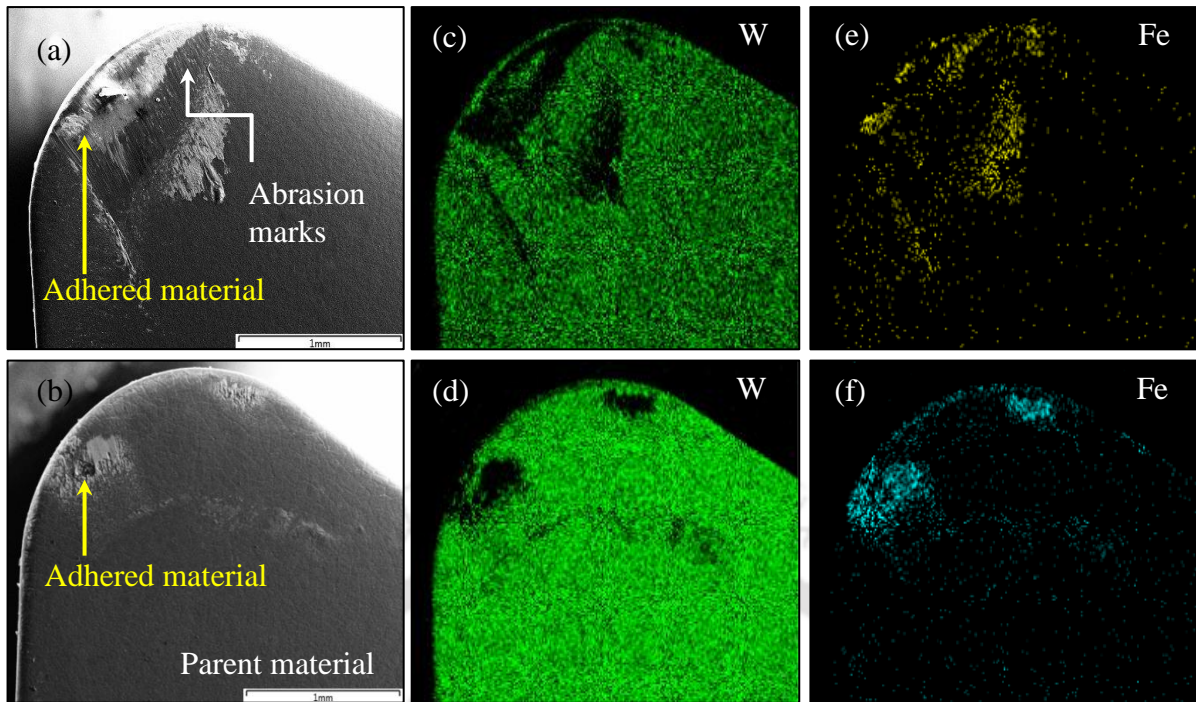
Surface morphology of the cutting tool rake surface after machining with MQCF using (a) mineral oil (MO), (b) 0.3 % concentration of MoS₂ based hybrid nano-green cutting fluid (GCF-0.3M), (c) elemental map of tungsten (W) for tested cutting tool rake surface with MO, (d) elemental map of tungsten (W) for tested cutting tool rake surface with GCF-0.3M, (e) elemental map of iron (Fe) for tested cutting tool rake surface with MO and (f) elemental map of iron (Fe) for tested cutting tool rake surface with GCF-0.3M
